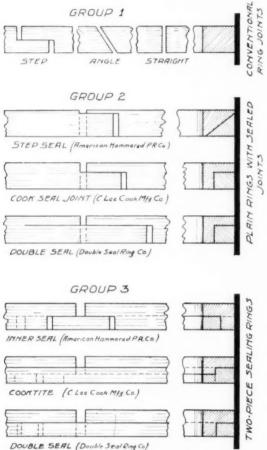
Showing constructional details in section and side view for piston rings with the conventional type of joints; also, various types of designs of plain rings, with sealed joints, and two piece scaling rings. For worn cylinders, the trend seems to be toward the use of two piece scaling rings.
